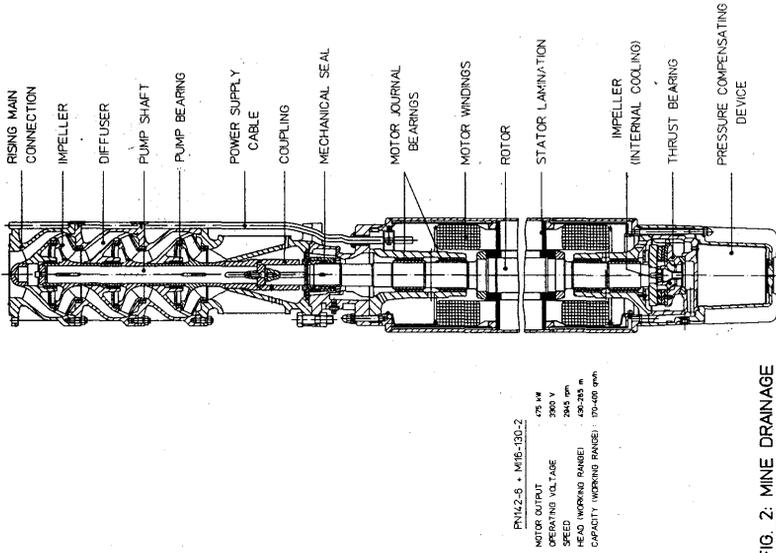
MINE DRAINAGE SUBMERSIBLE PUMP
